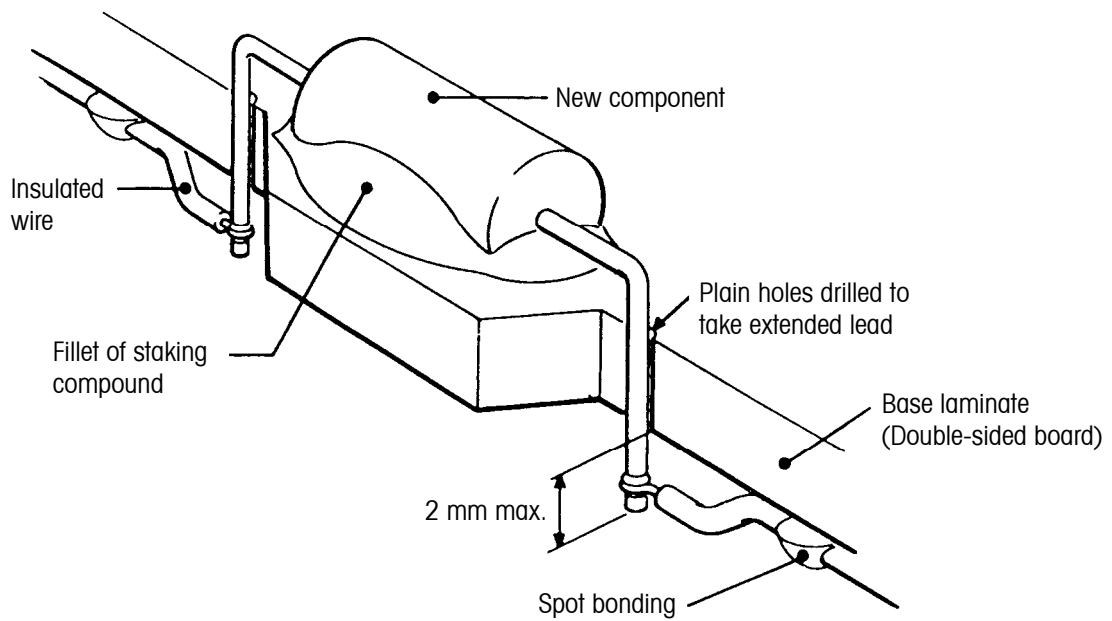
Mounting of additional component (on component side of board) with wire connections on reverse side of board using staking compound
